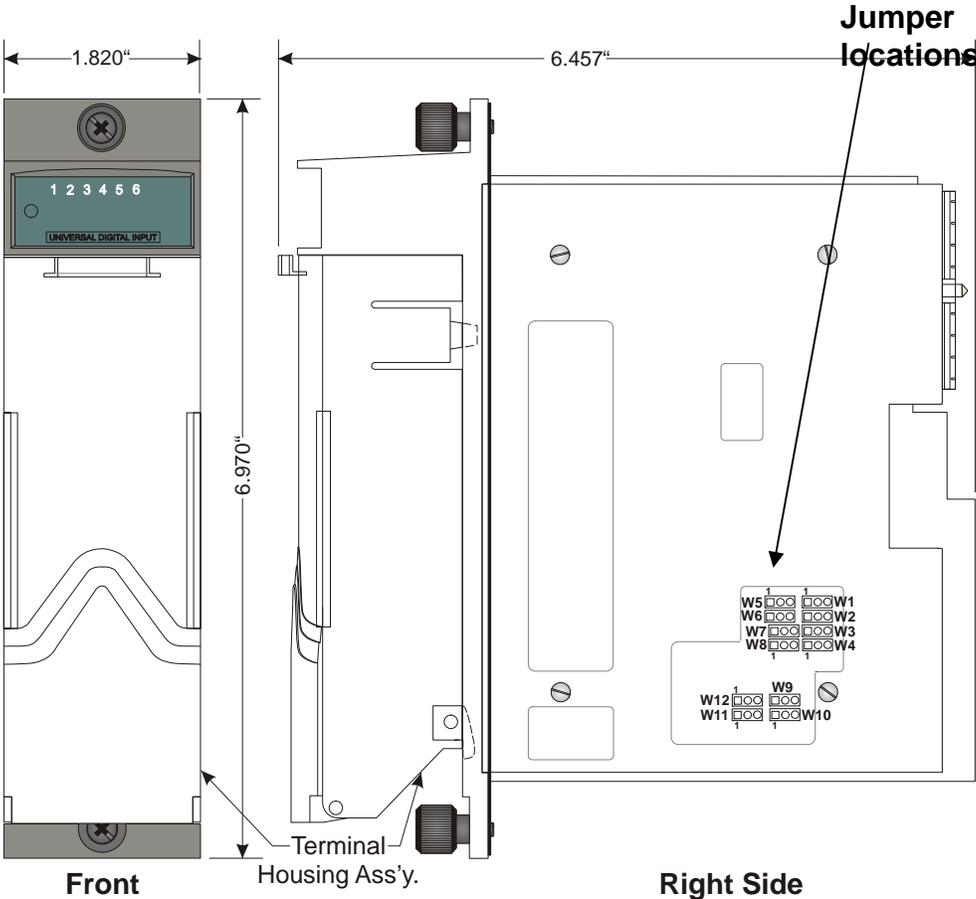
UDI Module -Right Side View -Jumper Locations
